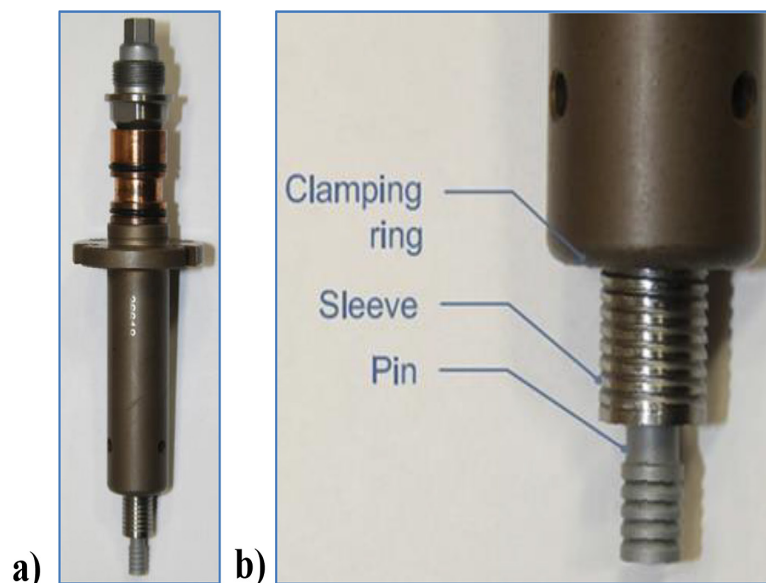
The welding tool: (a) general view, (b) close-up
